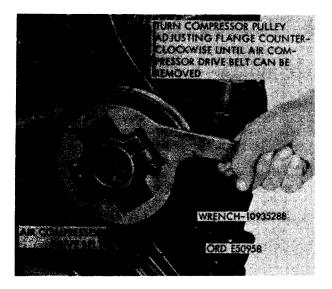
LOOSENING OR TIGHTEN-ING COMPRESSOR PULLEY ADJUSTING FLANGE.
